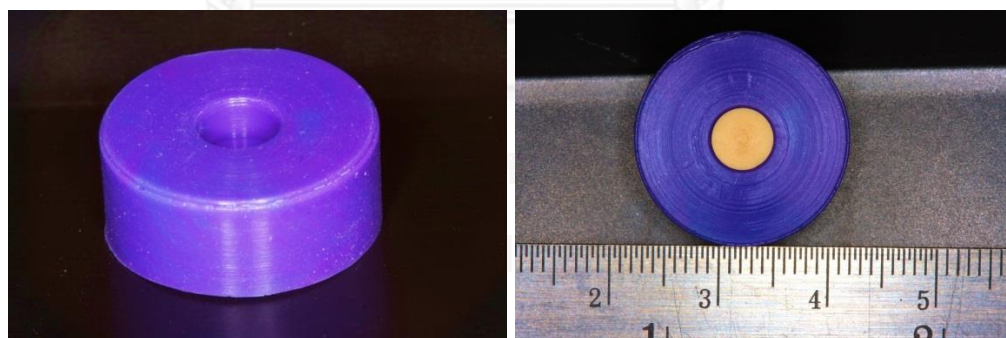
The tested mold with a 5-millimeter diameter and a 3-millimeter depth
